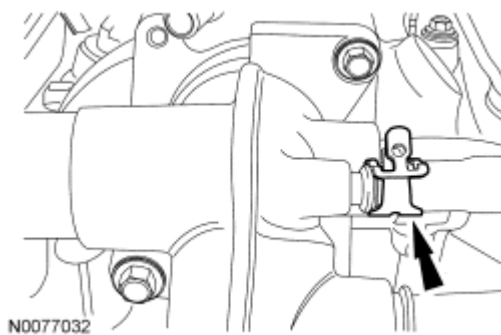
Identifying Coolant Bypass Hose From Thermostat Housing
